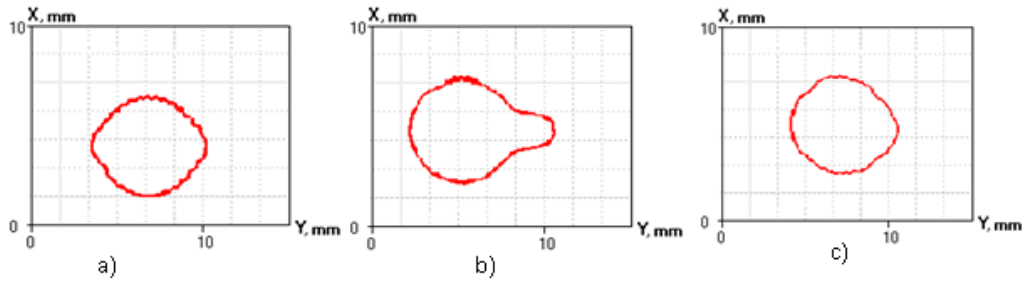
After processing outlines of rivet's junctions with possibly cracks: a – A16; b – A12; c – A9
